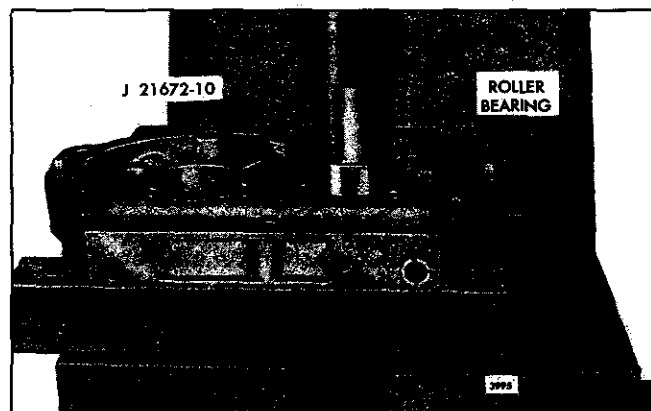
Installing Roller Bearing in Rear End Plate
